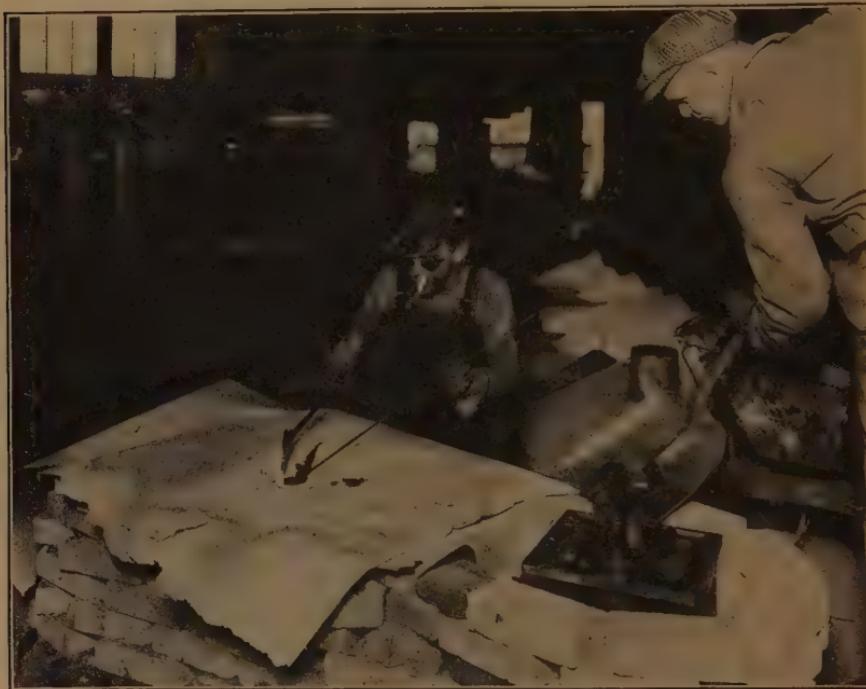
Welding Cylinders and Pre-Heating Fire for Cylinders
